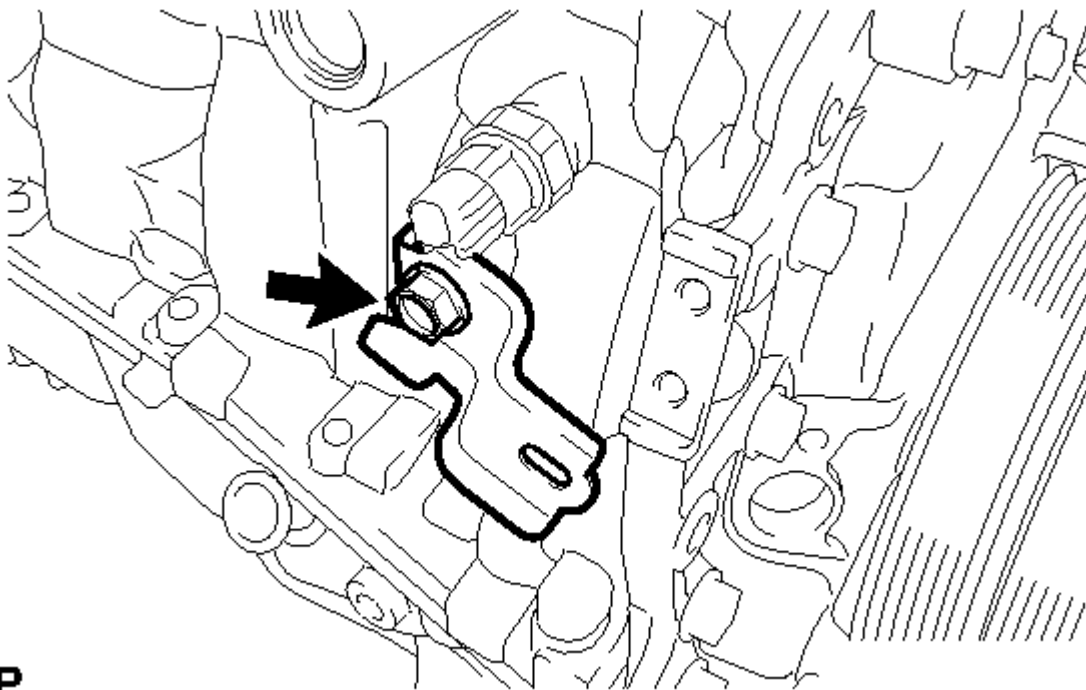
Identifying Wiring Harness Clamp Bracket Bolt
